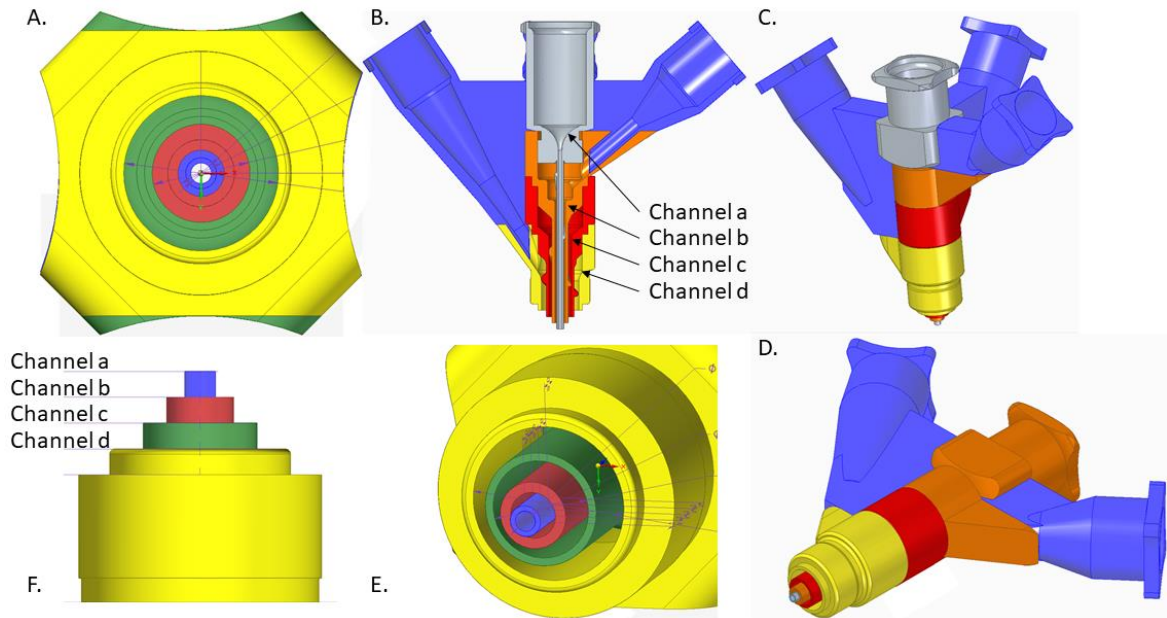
(A) CAD design bottom view of the developed four-layered coaxial extrusion system and, (B) Longitudinal cut four-layered coaxial nozzle, (C) The four-layered coaxial extrusion in isometric perspective, (D) Bottom-lateral assembly view of the four-layered coaxial extrusion, (E) an illustrated close-up of the tip nozzle multichannel outlet. (F) Lateral close-up of the coaxial nozzle tip with its different channels (Original Work).
